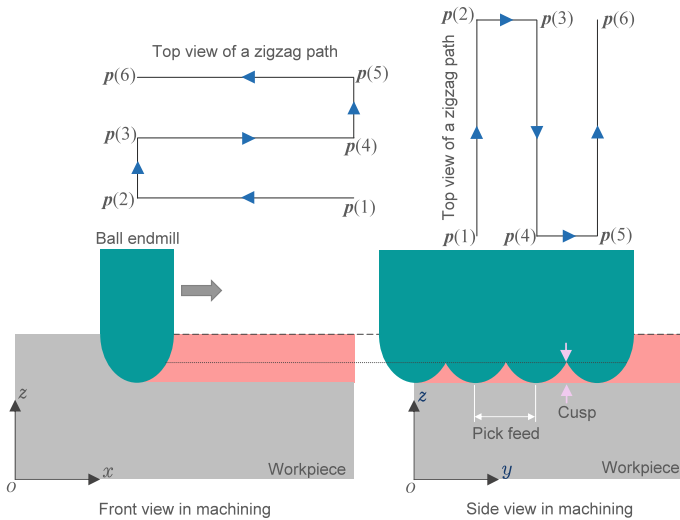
Image of undesirable cusp marks caused by the trajectory of a ball-end mill in removal machining process
